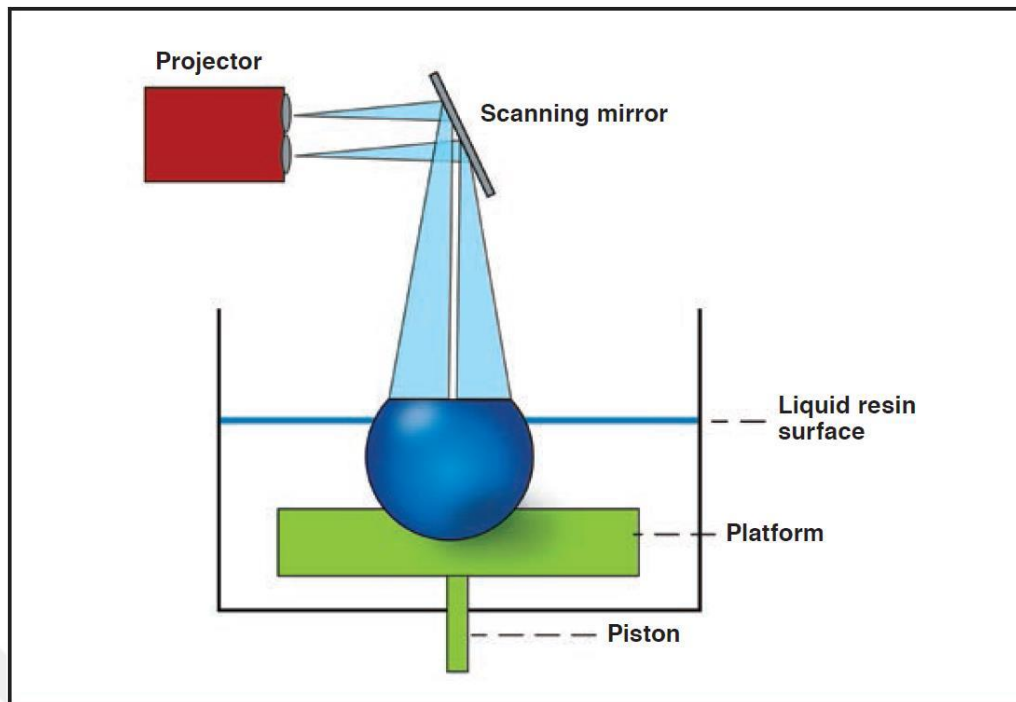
Digital Light Processing 3D Printing Technique
